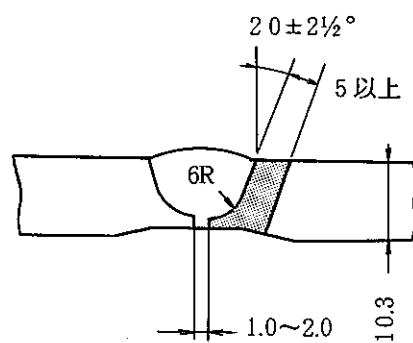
Location of Dissimilar Welds on IHX's
